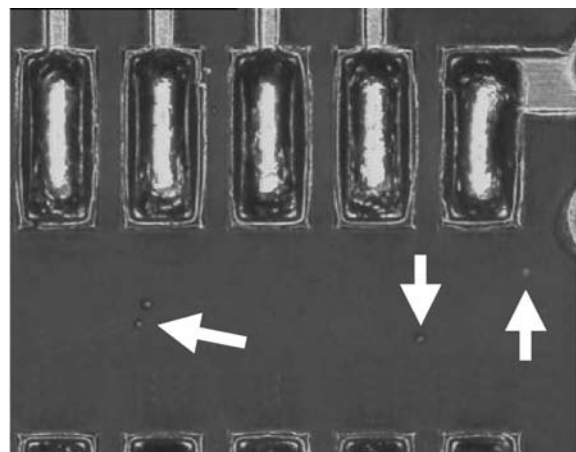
Pad or stencil design can reduce solder beading rate
